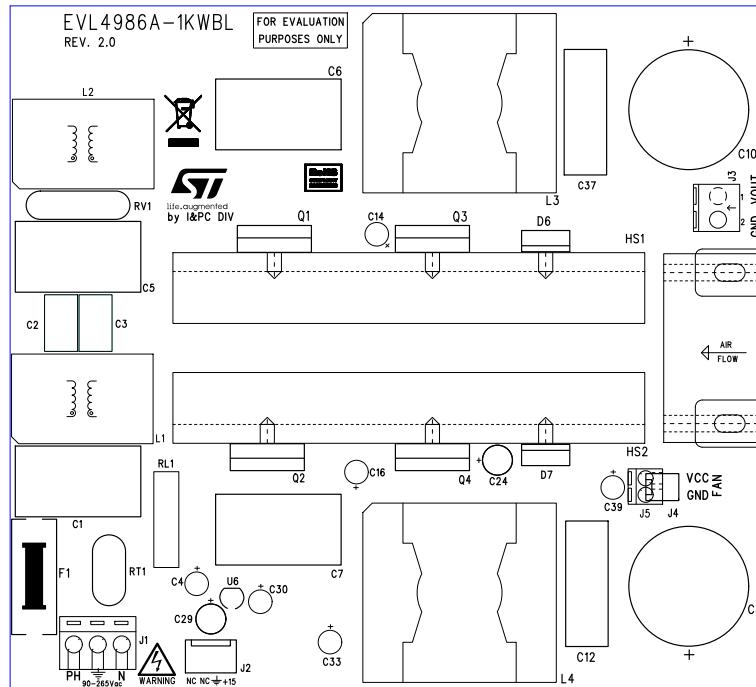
EVL4986A-1KWBL PCB layout—bottom side
